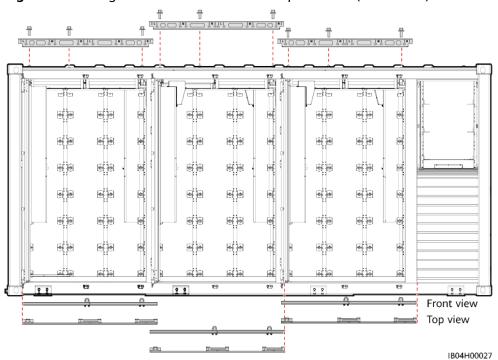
Long bottom beam installation position 1 (scenario 1)
